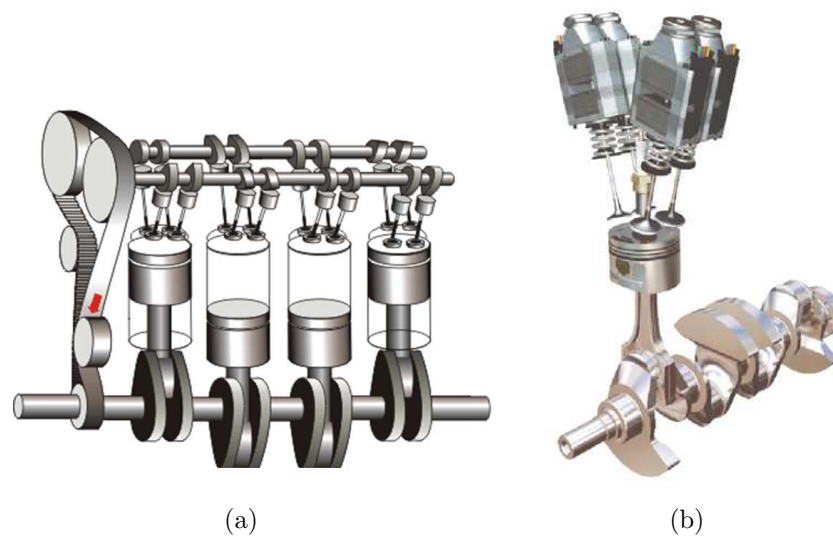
Two engine concepts: (a) Driven camshaft engine [2]; (b) Camless solution [1].
